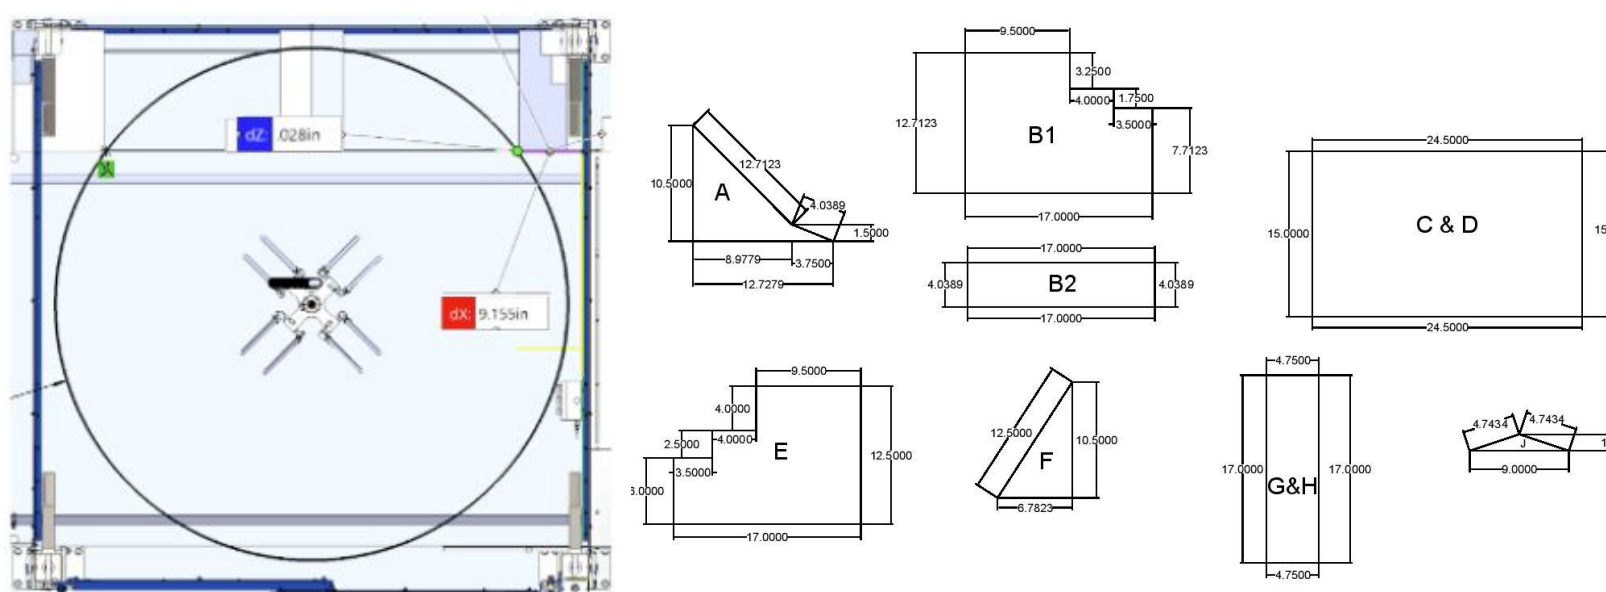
Working zone of the robotic arm. Figure 6: Final component dimensions for steel and plexiglass chute shields.
